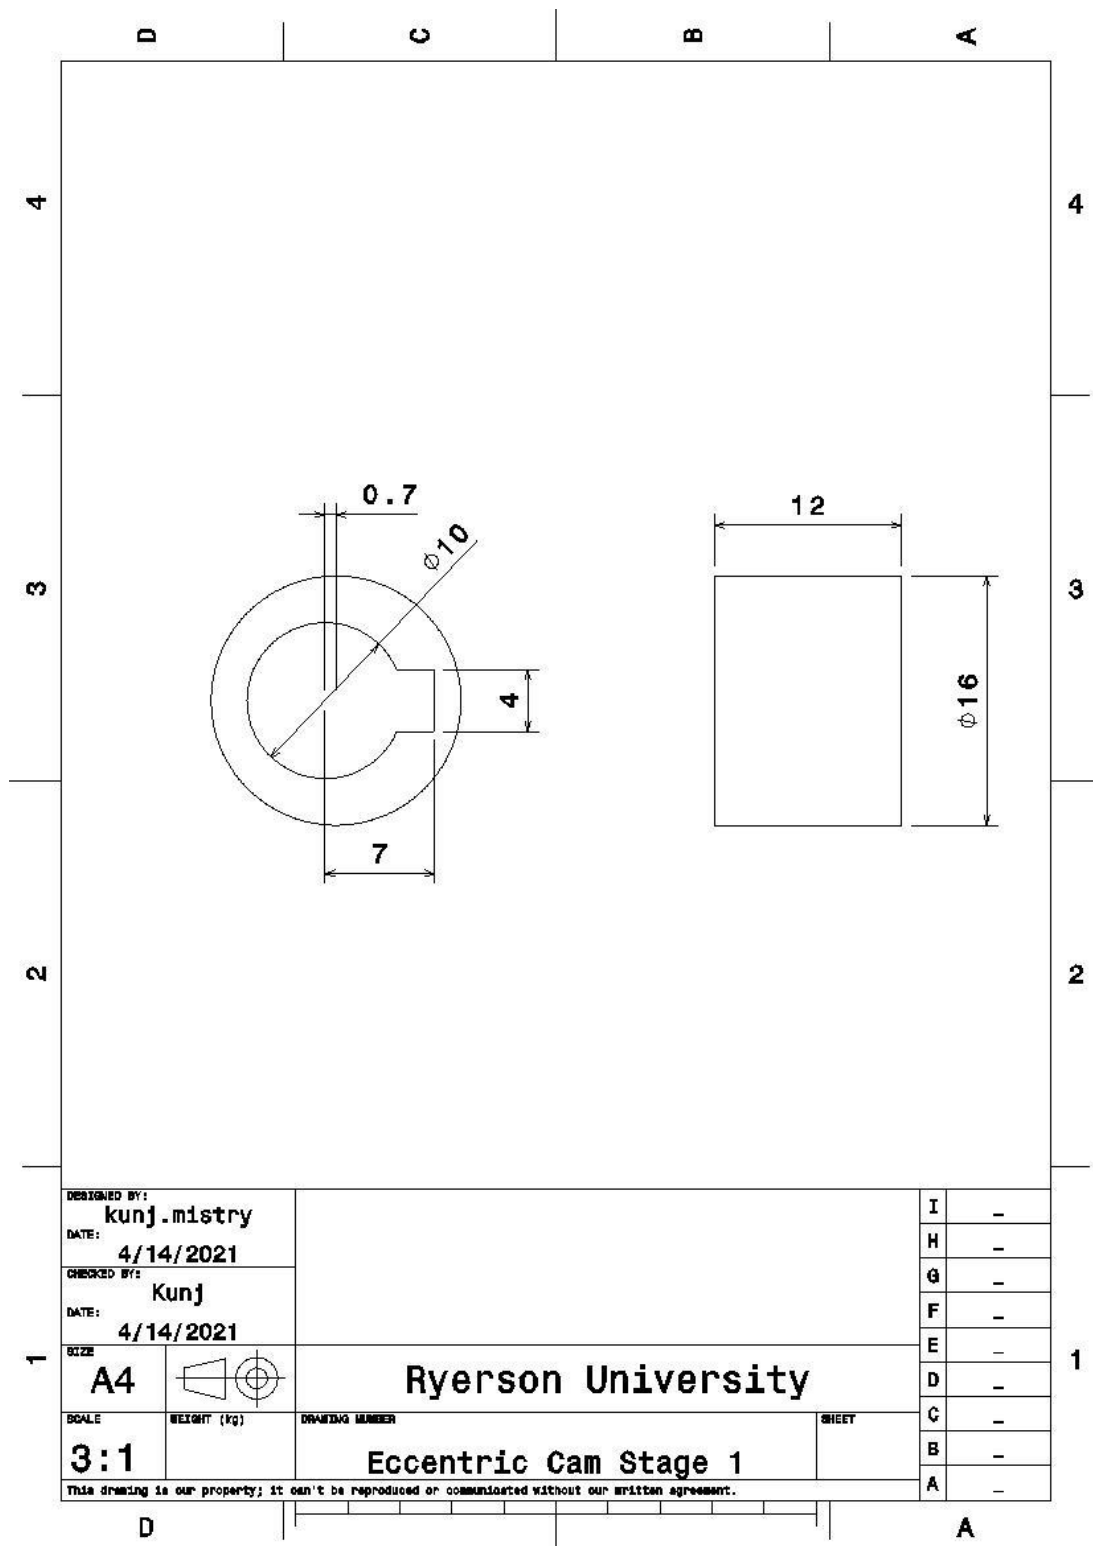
Eccentric cam stage 1 engineering drawing.
